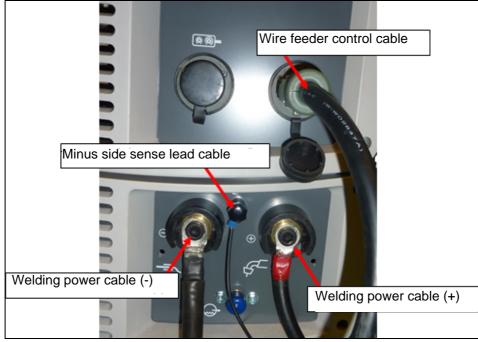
(a) Connection of DAIHEN digital welding power supply
